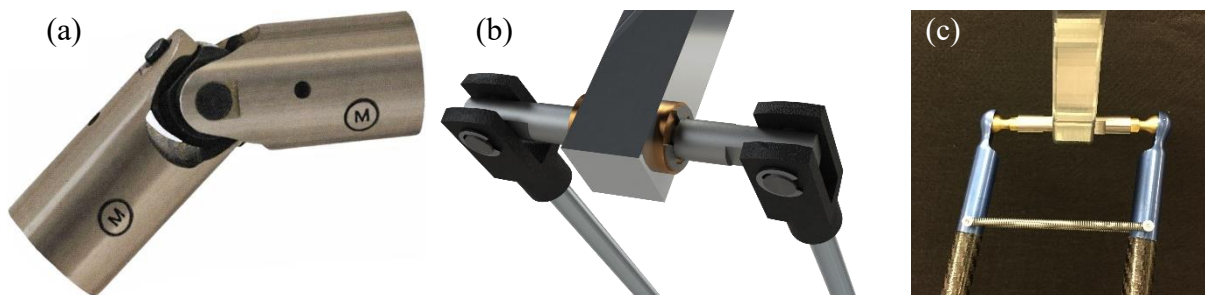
Different designs for a universal joint. (a) traditional cross style universal joint (b) 1st iteration of PARTNER joint design (c) 2nd iteration of PARTNER joint design.
